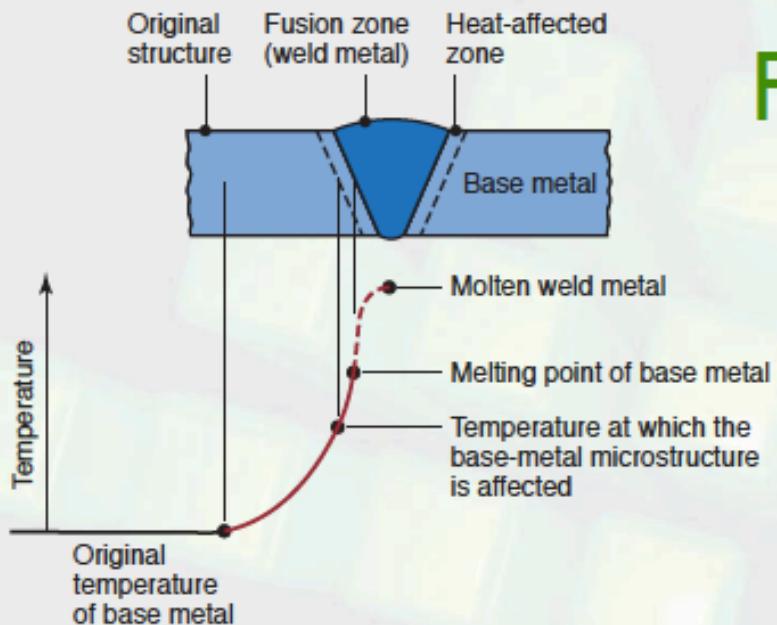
Characteristics of a typical fusion weld zone in oxyfuel gas welding and arc welding processes.
